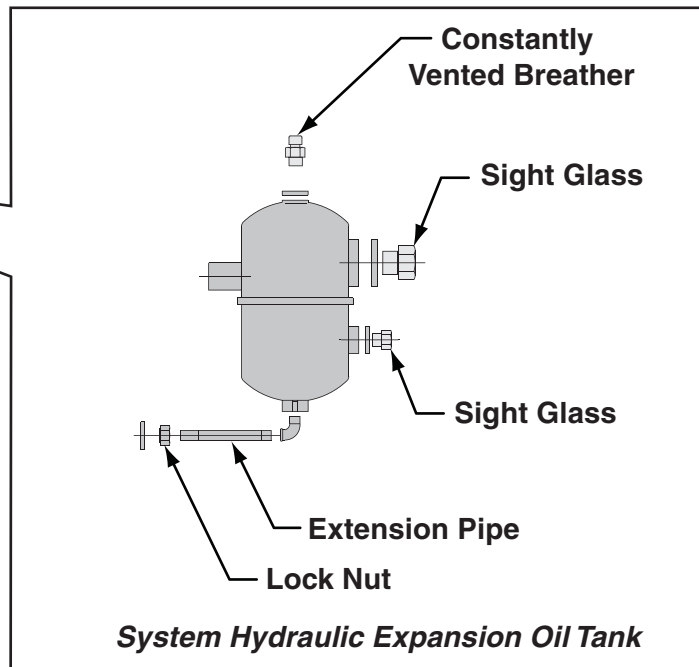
Brake and Gear Box Expansion Oil Tanks Maintenance
